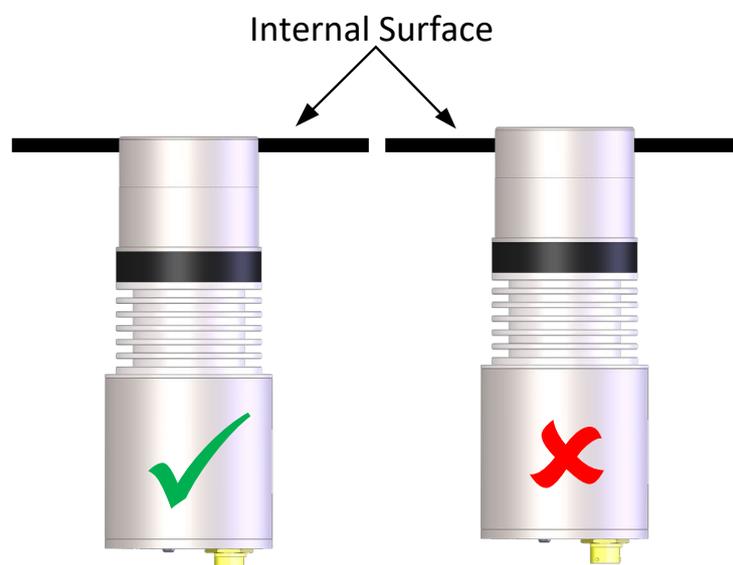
Flat Surface Installation (Fixing Plate and Clamp Ring Not Shown)
